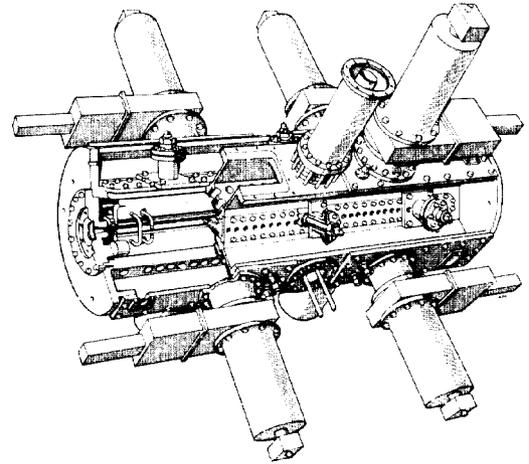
Cutaway drawing of the RFQ showing position of VCR's and end-flange tuners.
